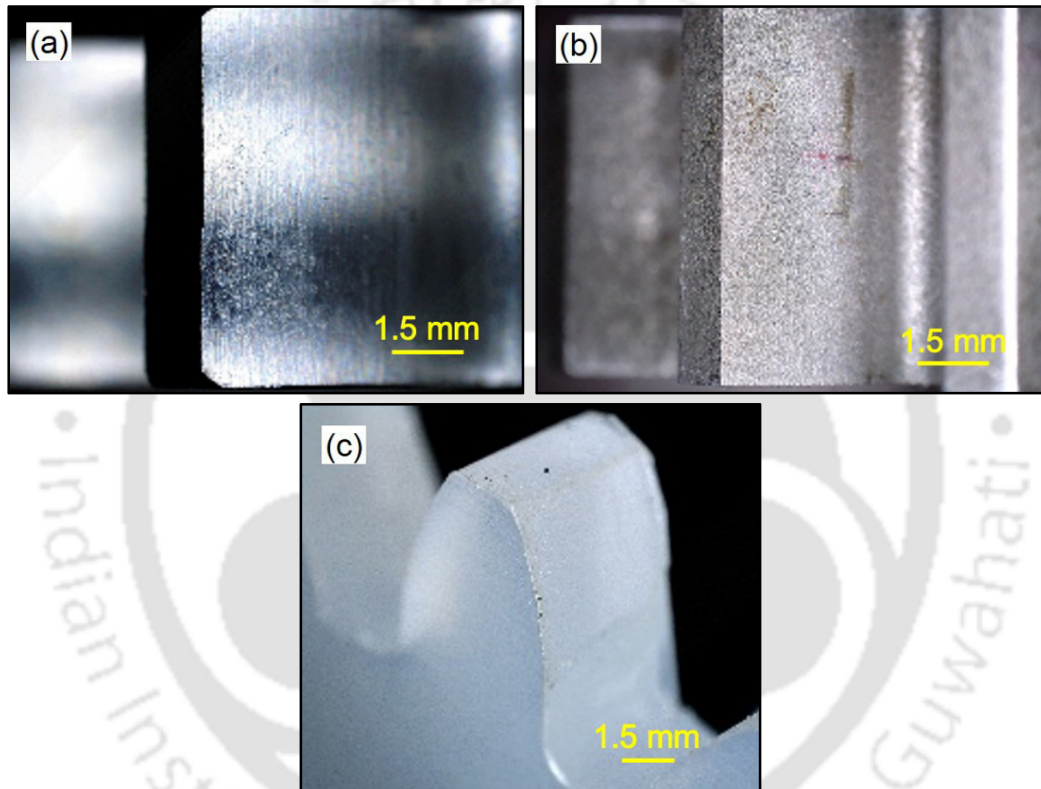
Mating gear tooth surface manufactured by (a) conventional machining, (b) wire-cut electric discharge machining, and (c) Injection-moulded polypropylene gear showing tooth profile
